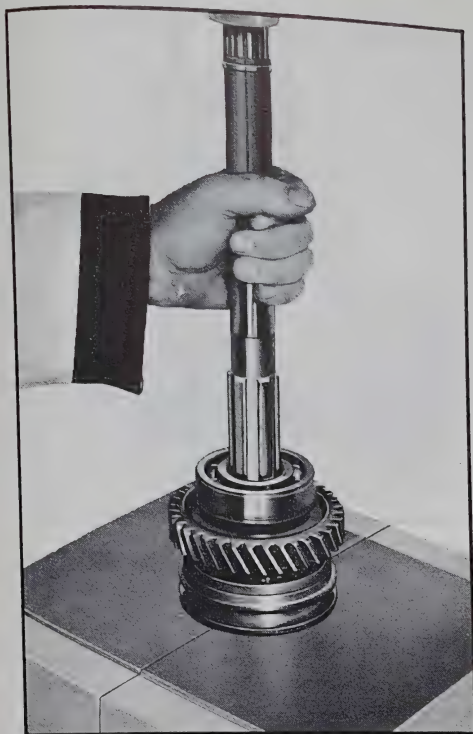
Removing Mainshaft from First and Second Speed Clutch Assembly
